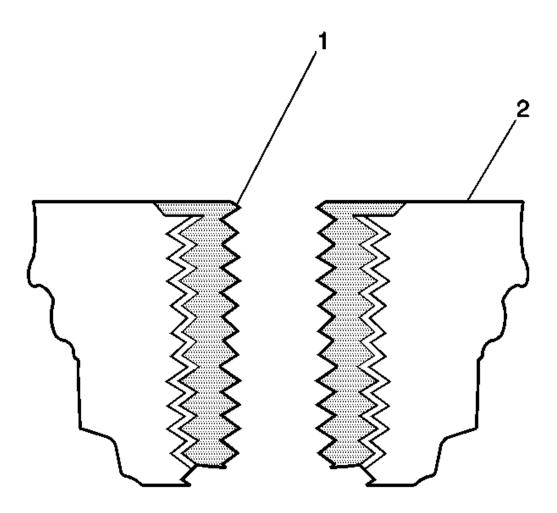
View Of Bushing Type Insert & Base Material Courtesy of GENERAL MOTORS CORP.
